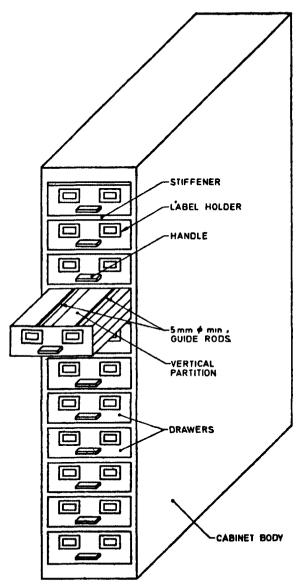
TYPICAL SKETCH OF STEEL CABINETS FOR CARD INDEX (Continued)
